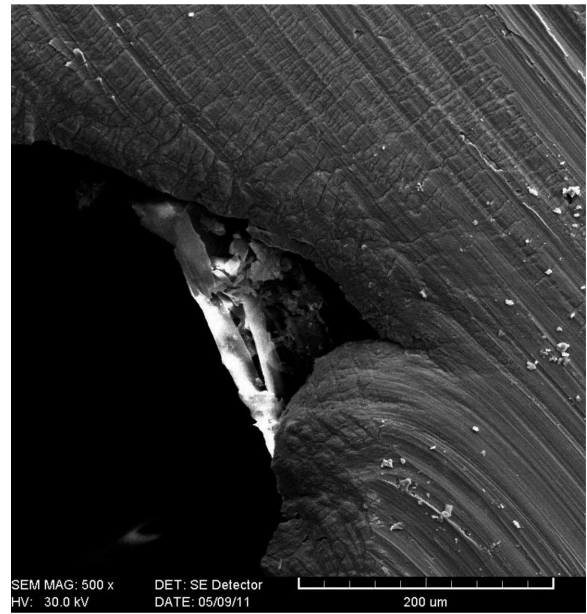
Fractured surface of Au-20Sn solder with a partial tearing out of Cu substrate
